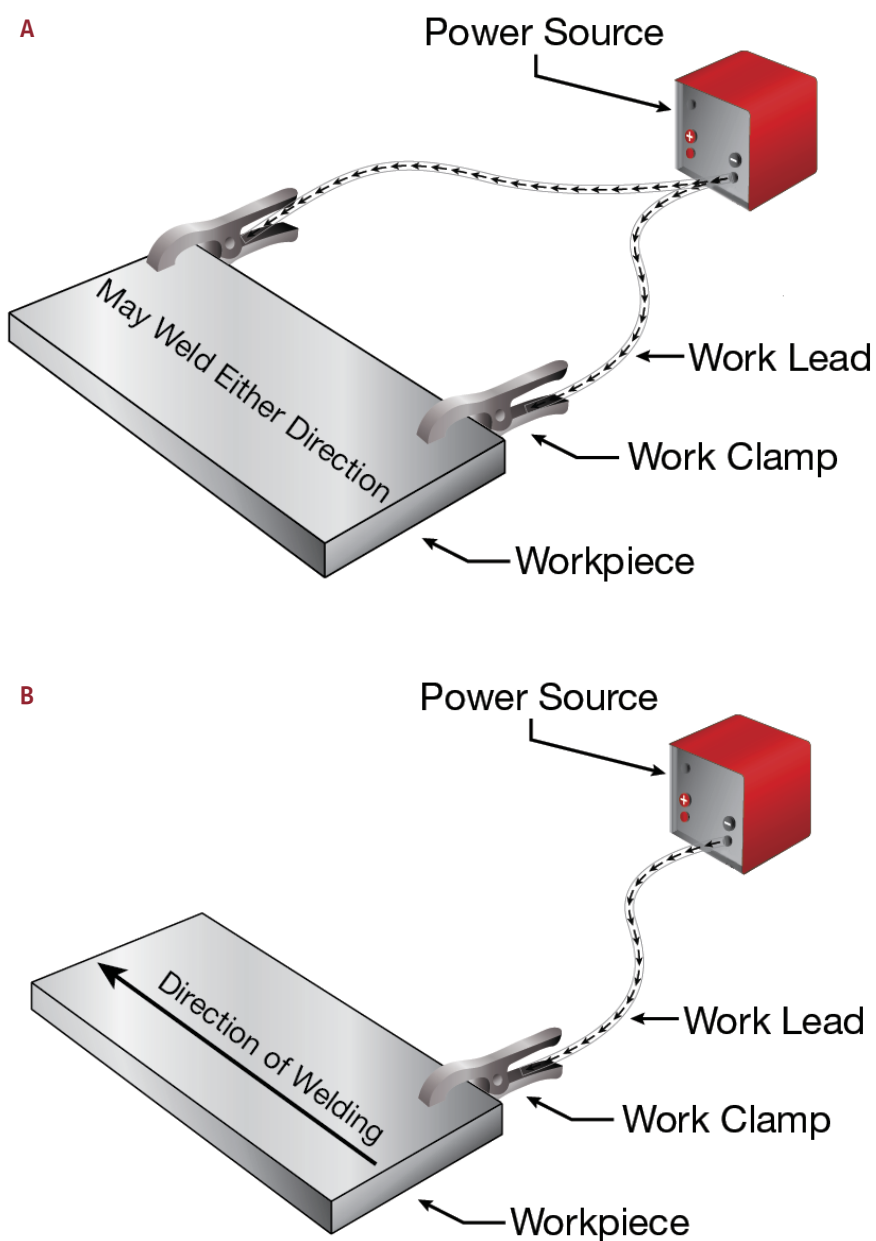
A, Setup for Welding in Either Direction; B, Setup for Welding in One Direction
